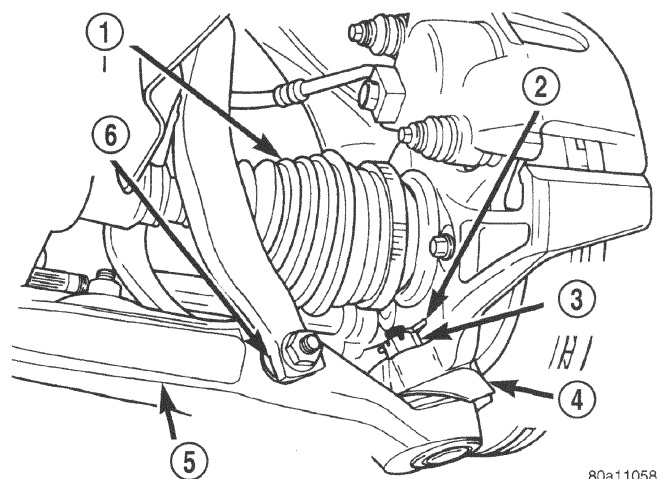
Tie Rod End Removal From Steering Knuckle
